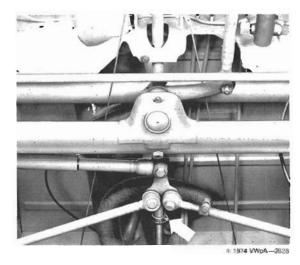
Coupling (arrow) where gearshift rod can be disconnected
